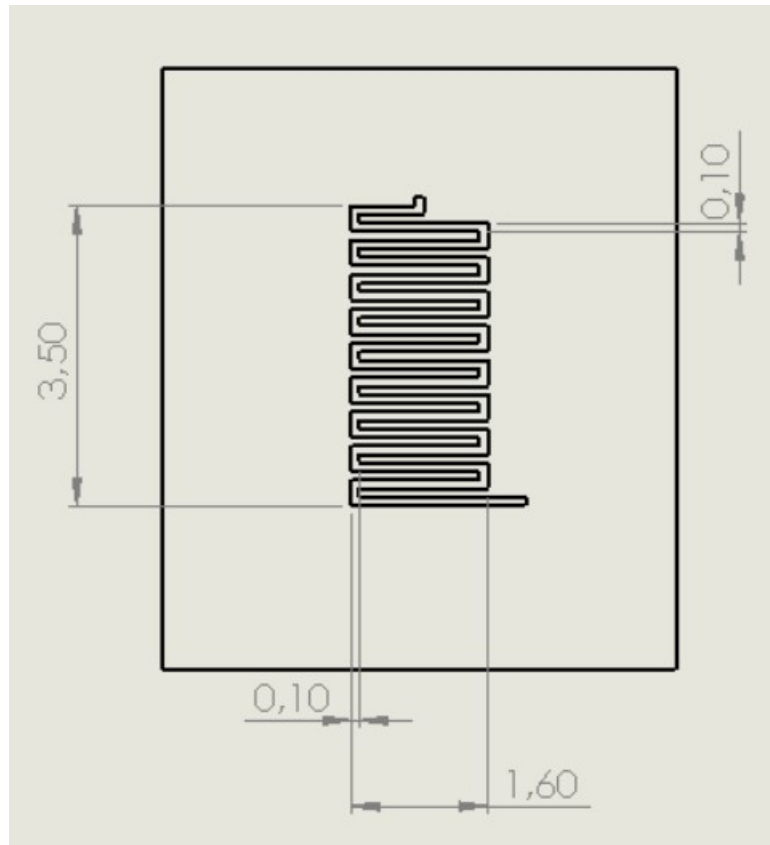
Technical design with dimensions in *mm* of the wafer containing the cooling channel
